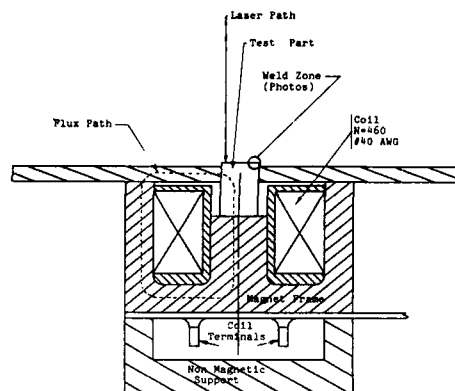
Cross section of test part weld positioning fixture.
